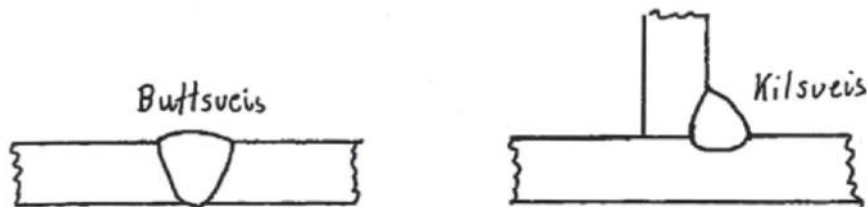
Butt weld, fillet weld (Pedersen, 2019)
